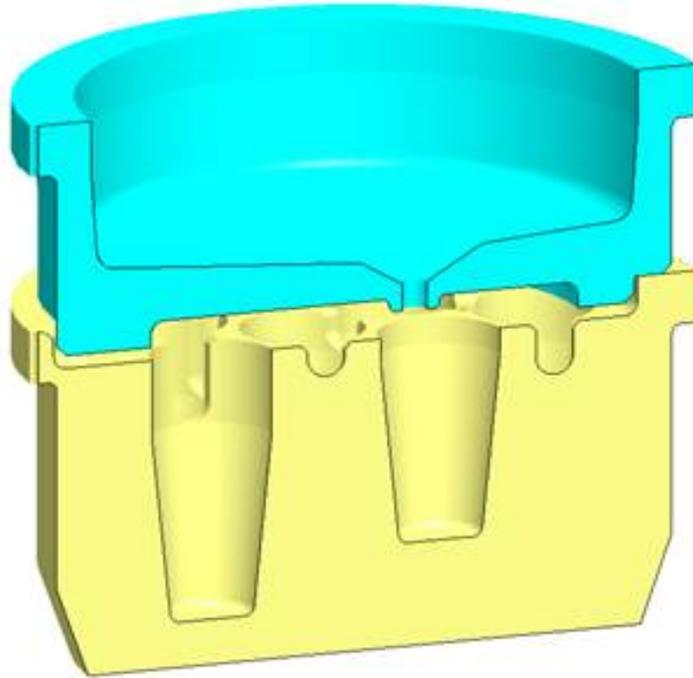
Cross-section of the assembled two-piece graphite crucible for drip casting uranium products.
